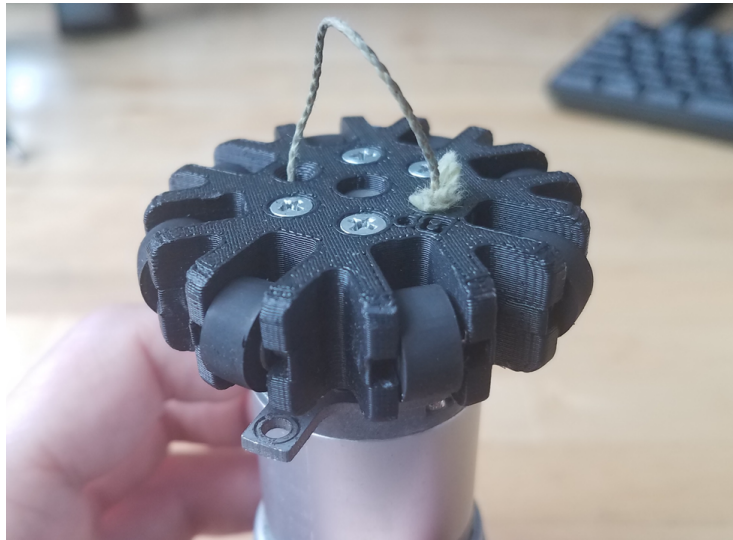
Image of friction wheel with rollers attached to the drive motor to create the friction drive assembly.
